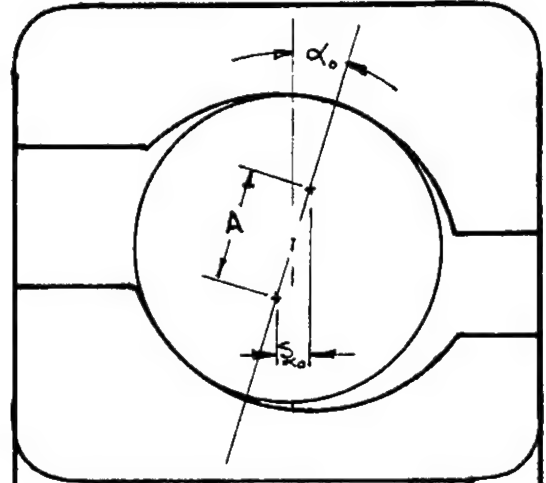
ANGULAR CONTACT BALL BEARING GEOMETRY
